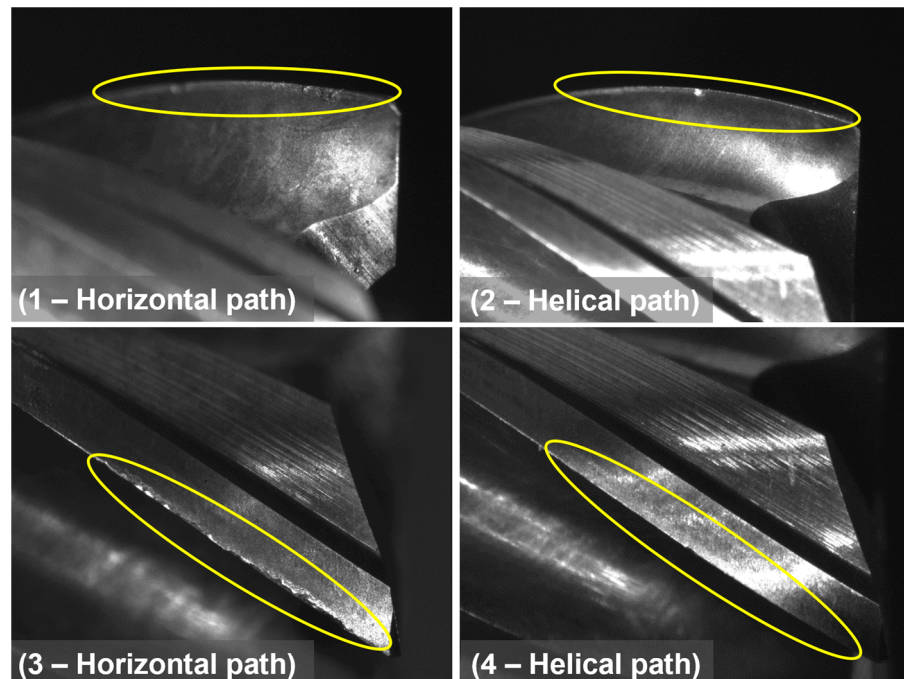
Wear on the cutting edges of the milling tools after the whole milling operation.
